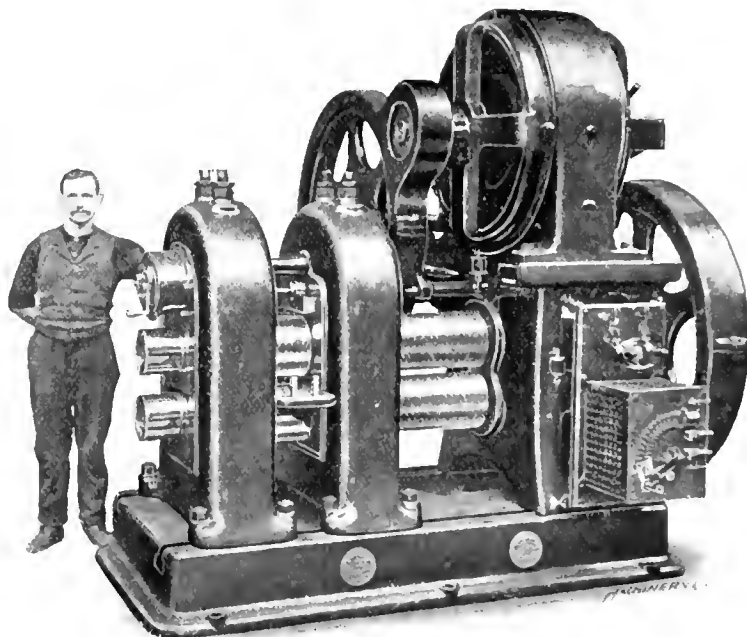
Ferracute Rolling Mill Designed especially for Rolling Precious Metals for Coinage.
